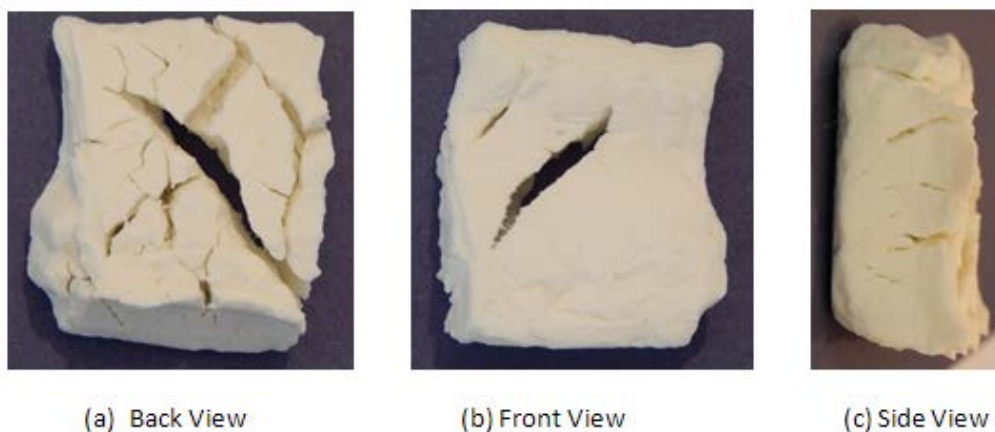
Sintered AW implant from green part of implant produced from FDM mould with Al sheet shell mould.
